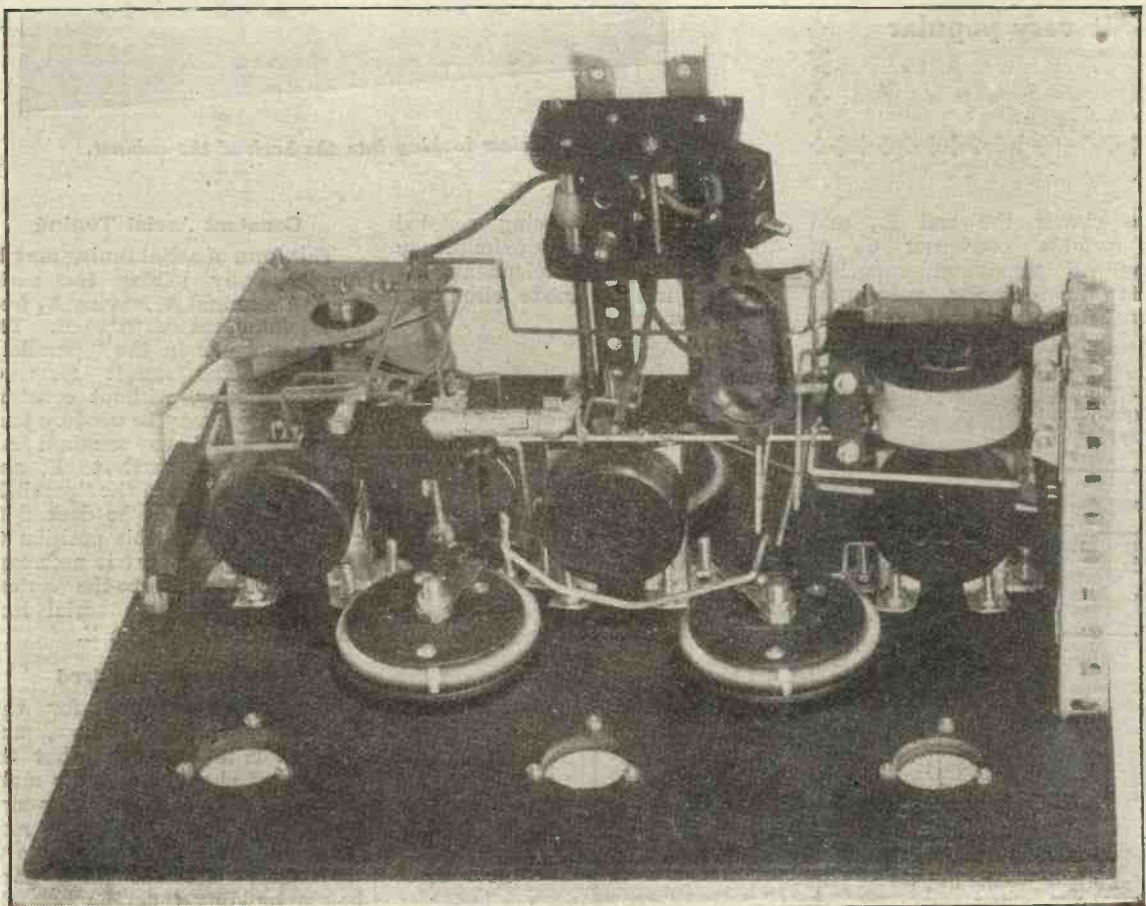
The manner in which the valve holders are mounted upon the panel may be gathered from this photograph.
